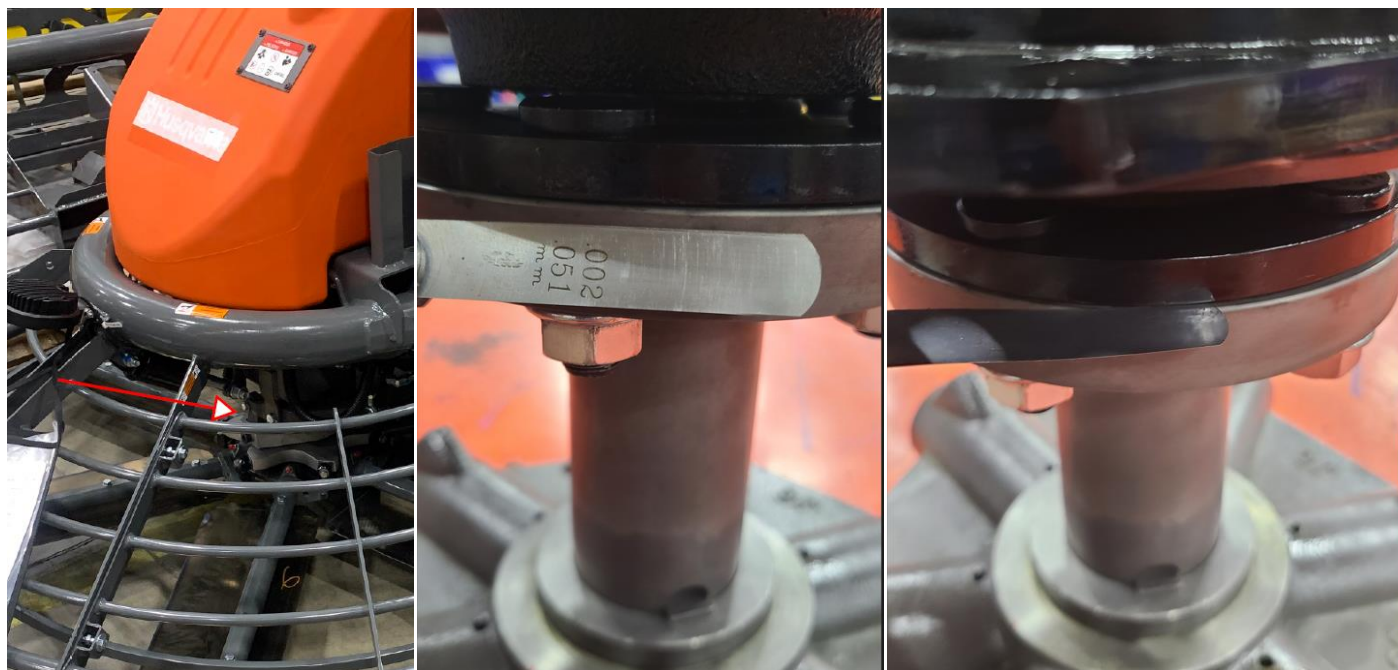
4: Check if there is a gap between the hydraulic motor flange and the stub shaft.
